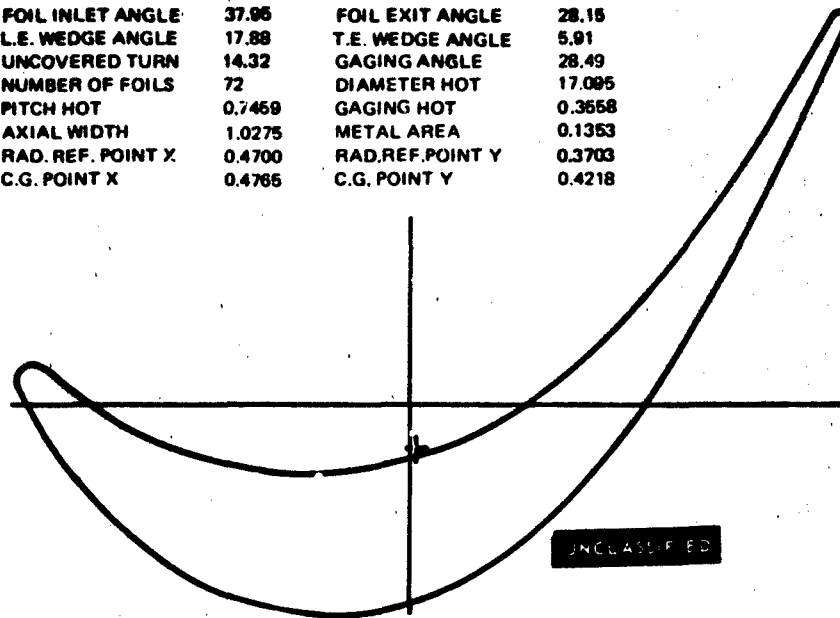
Section B-B, Second Vane $\frac{1}{4}$ Root, Cylindrical
